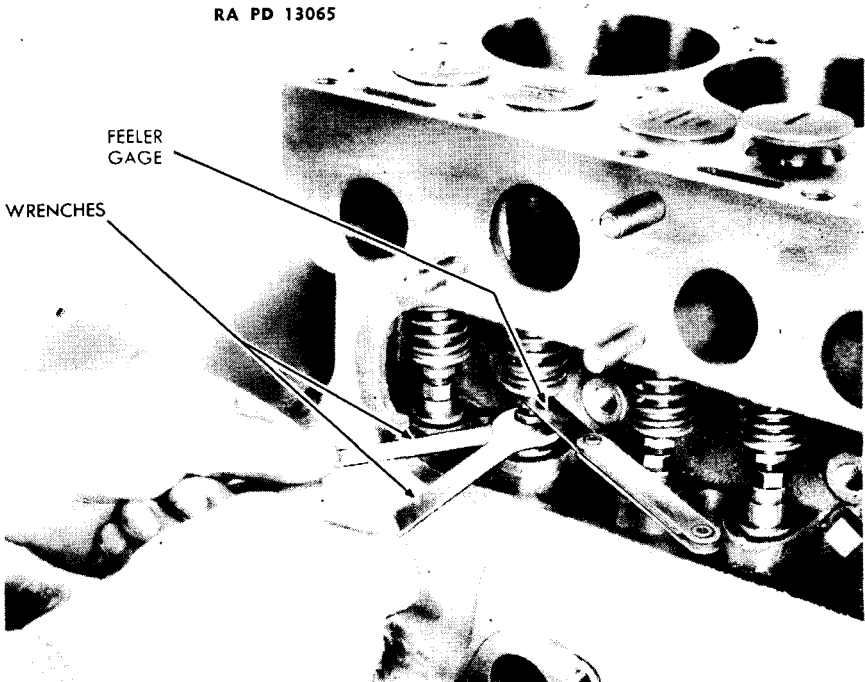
Adjusting Valve Clearance - (Gasoline Engine)
